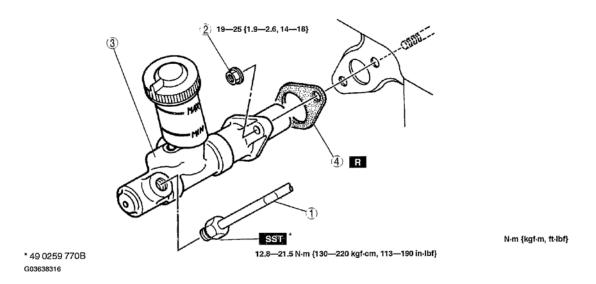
Installing Clutch Master Cylinder (BP) - With Torque Specifications Courtesy of MAZDA MOTORS CORP.
